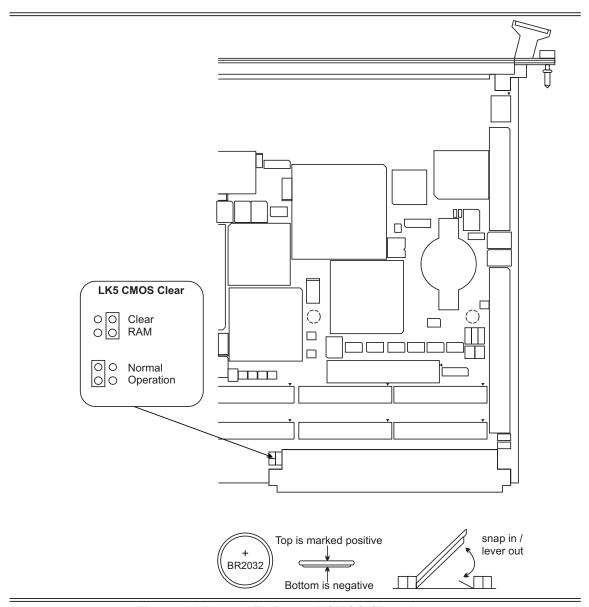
Battery Fitting and CMOS Clear Jumper
